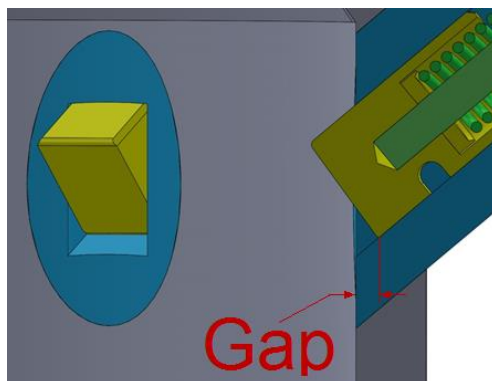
Lower alignment, between Latch Bar and TSUDL inner surface.
